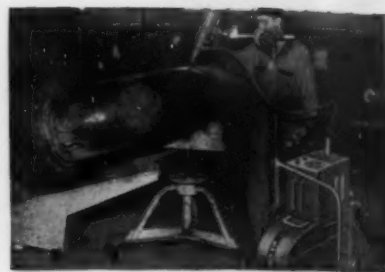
Perfect X-Ray Results on welding flanges and fittings. Welding gun is mounted on inexpensive fixture.
